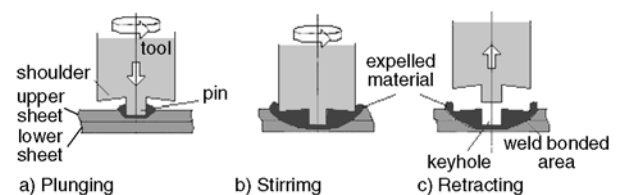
Three phases of friction stir spot welding process, (a) plunging, (b) stirring and (c) retracting
